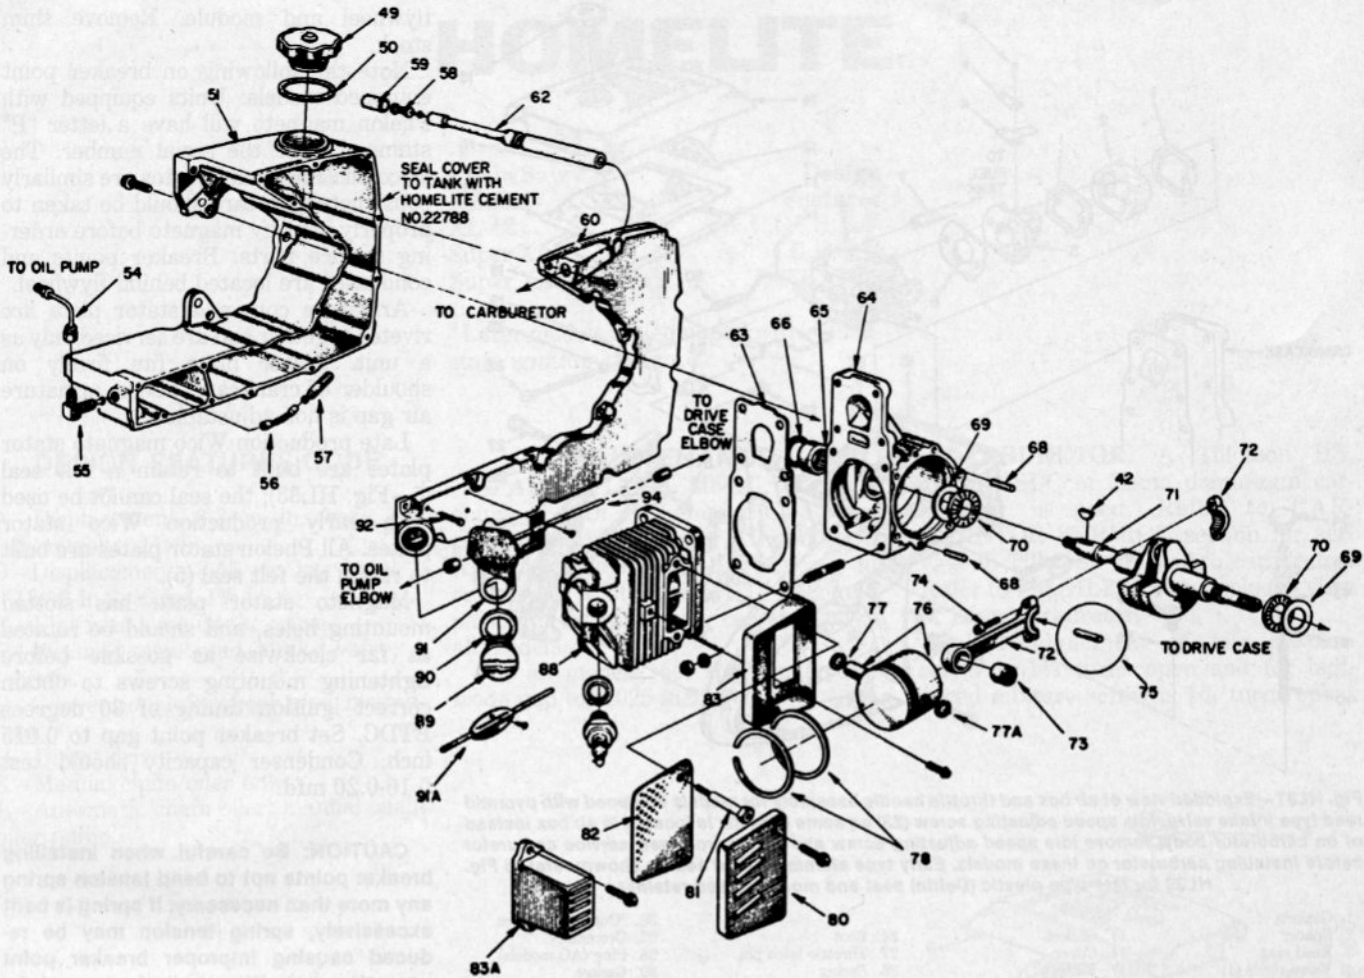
Exploded view showing powerhead and fuel tank construction of Model XL-12; refer to Fig. HL35 for other models. Dowel pins (68) are used on later models. Refer to text. Single or two-piece muffler may be used. Shield (91) is not used on later models.
